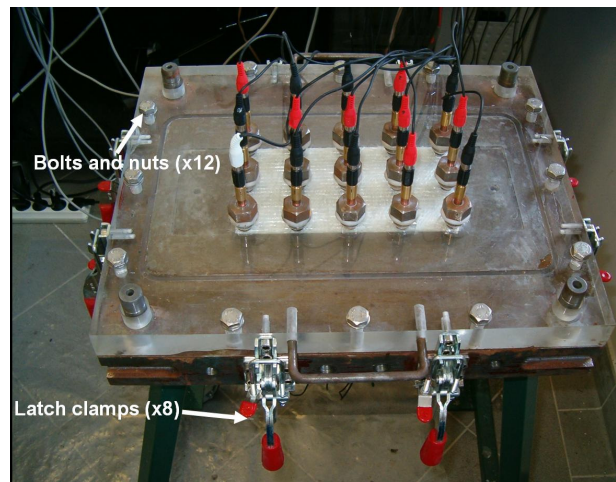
Clamps and bolts for mold closure with plexiglass upper mold plate.
